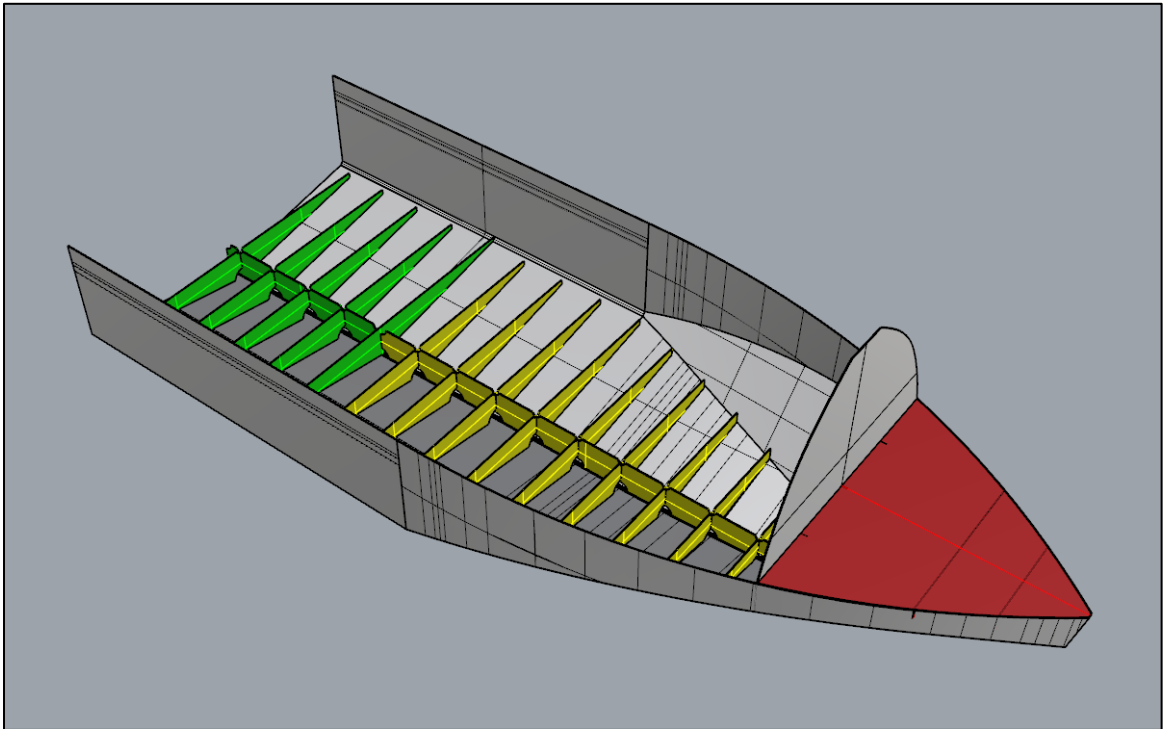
Keel tank divided into two sections. 3/16" thick aluminum 6061 transverse frames spaced 12" apart with a 1/4" thick central girder along the keel tank.
